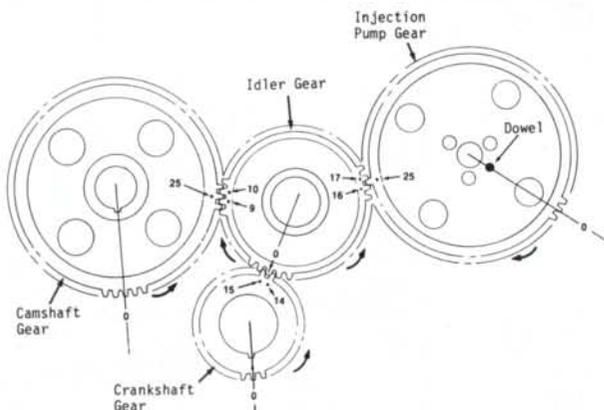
View showing timing gear marks in proper meshed position on four-cylinder engines. Numbers on the gears indicate tooth numbers (counting from tooth number 0) to be aligned if timing marks are not present.
